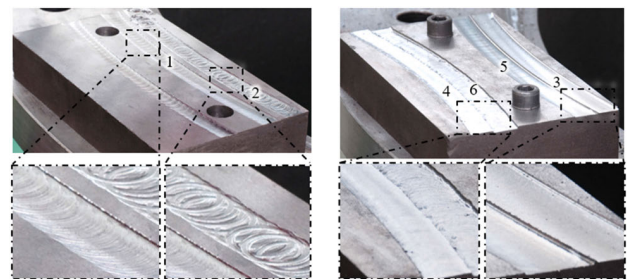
Samples after machining (with cutting tests marked 1-6).
